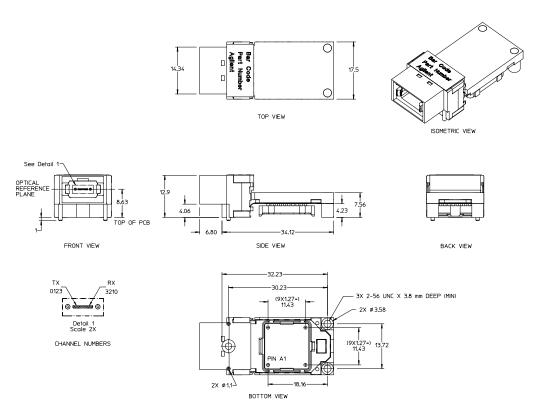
A - HFBR-7924H Package Dimensions (dimensions in mm)
